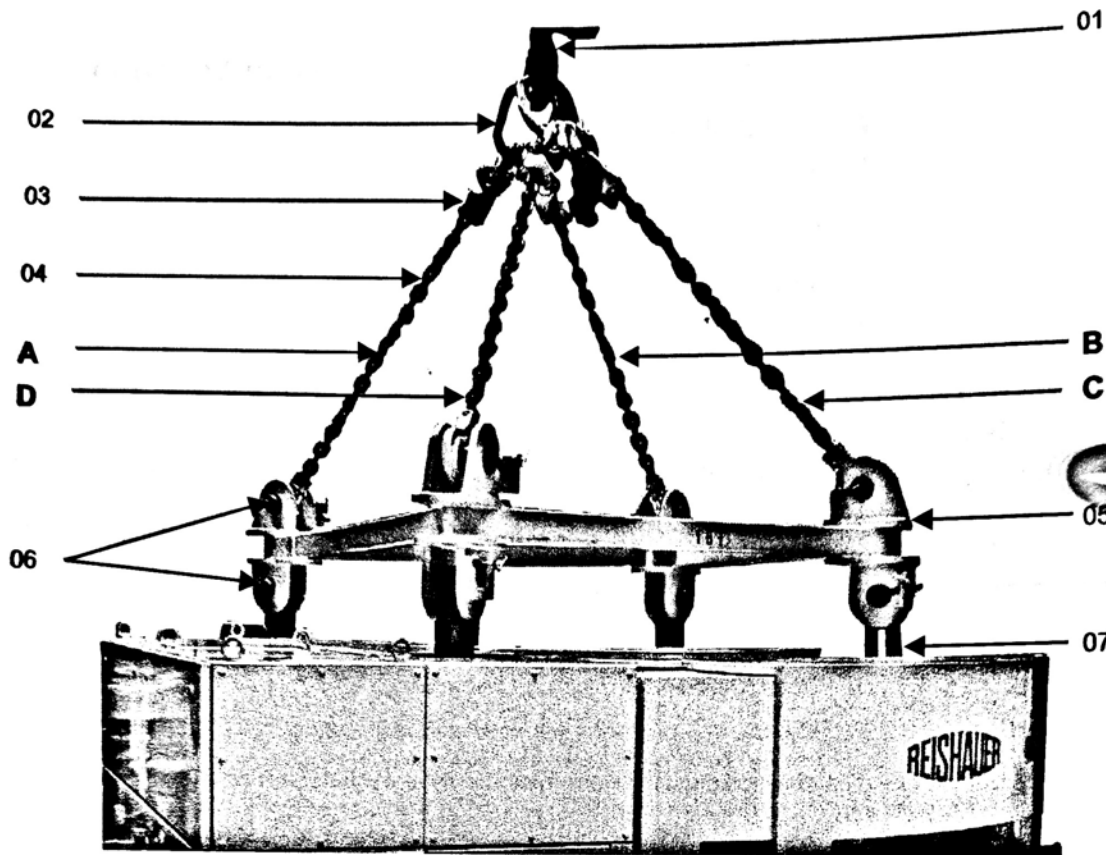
Machine hooked to the lifting device (viewed from operator side)
